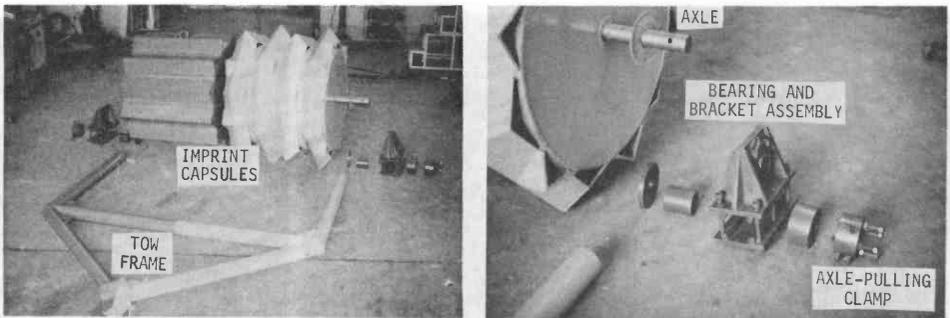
The land imprinter consists of a compound roller-and-axle assembly in which two imprint capsules are linked rigidly together by means of the axle and a special axle-pulling clamp. The pictured capsules are designed to shape runoff-fed seedbeds by molding moist surface soil and plant materials into complex geometric patterns.
